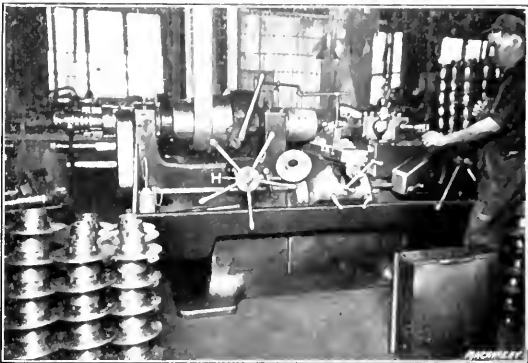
No. 9 Bardons & Oliver Turret Lathe used for machining Automobile Wheel Hubs
